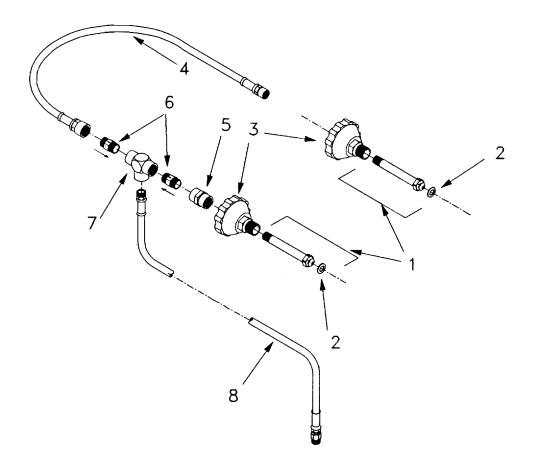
TANK CONNECTOR ASSEMBLY (HA003)
